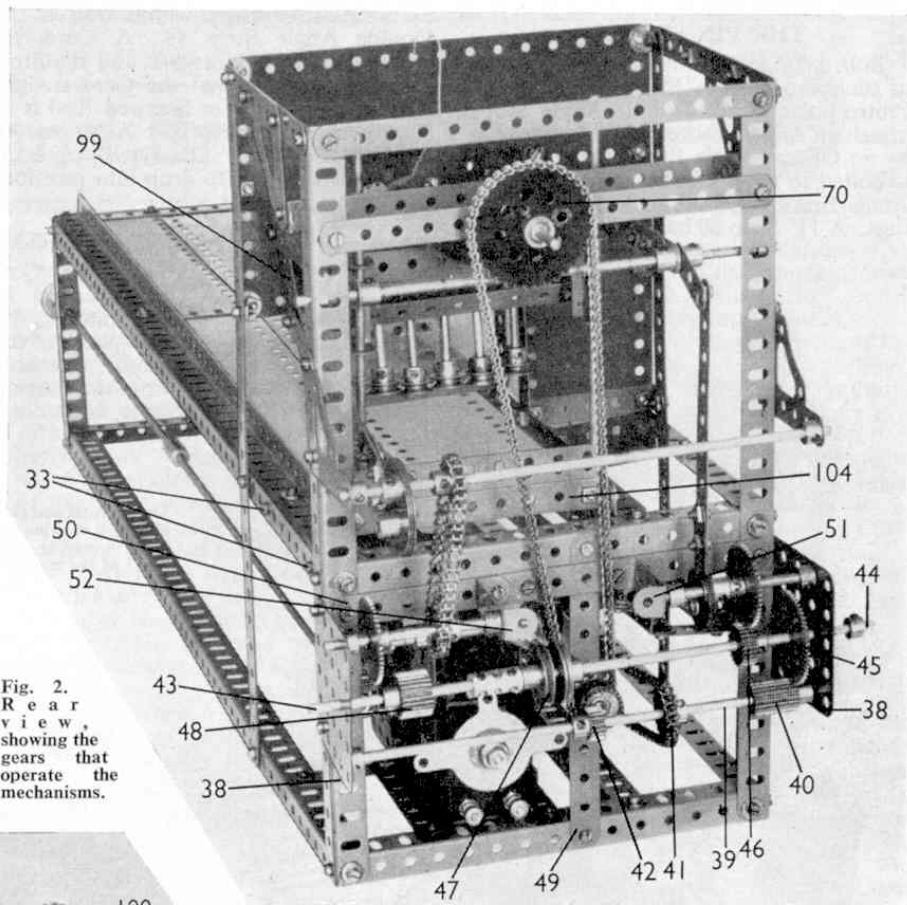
Rear view, showing the gears that operate the mechanisms.
